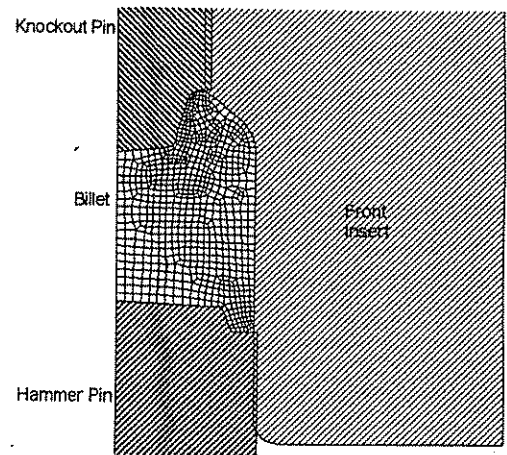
Die fill and workpiece geometry after second operation (100% stroke).
